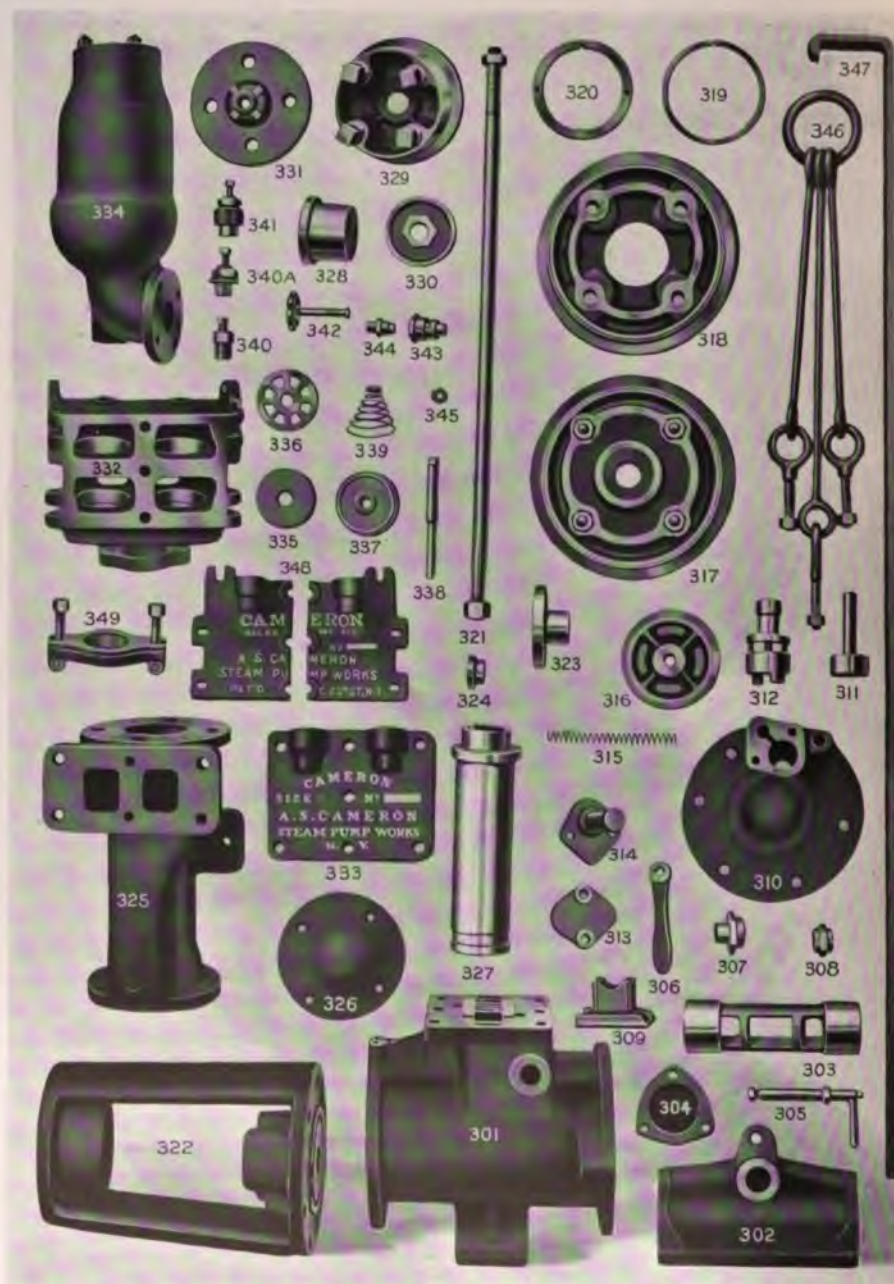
DETAILS OF CAMERON VERTICAL PLUNGER SINKING PUMPS
